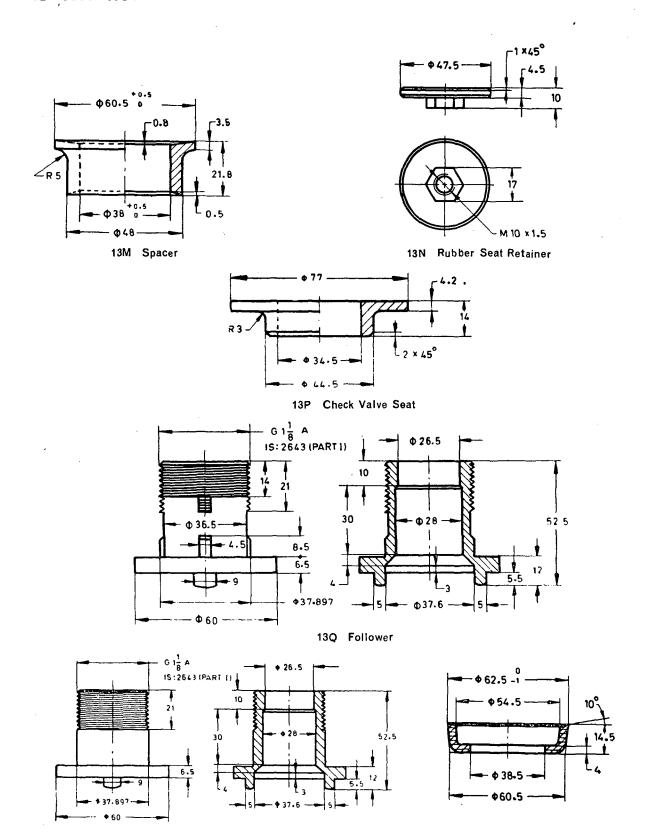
CYLINDER ASSEMBLY PARTS - Contd
